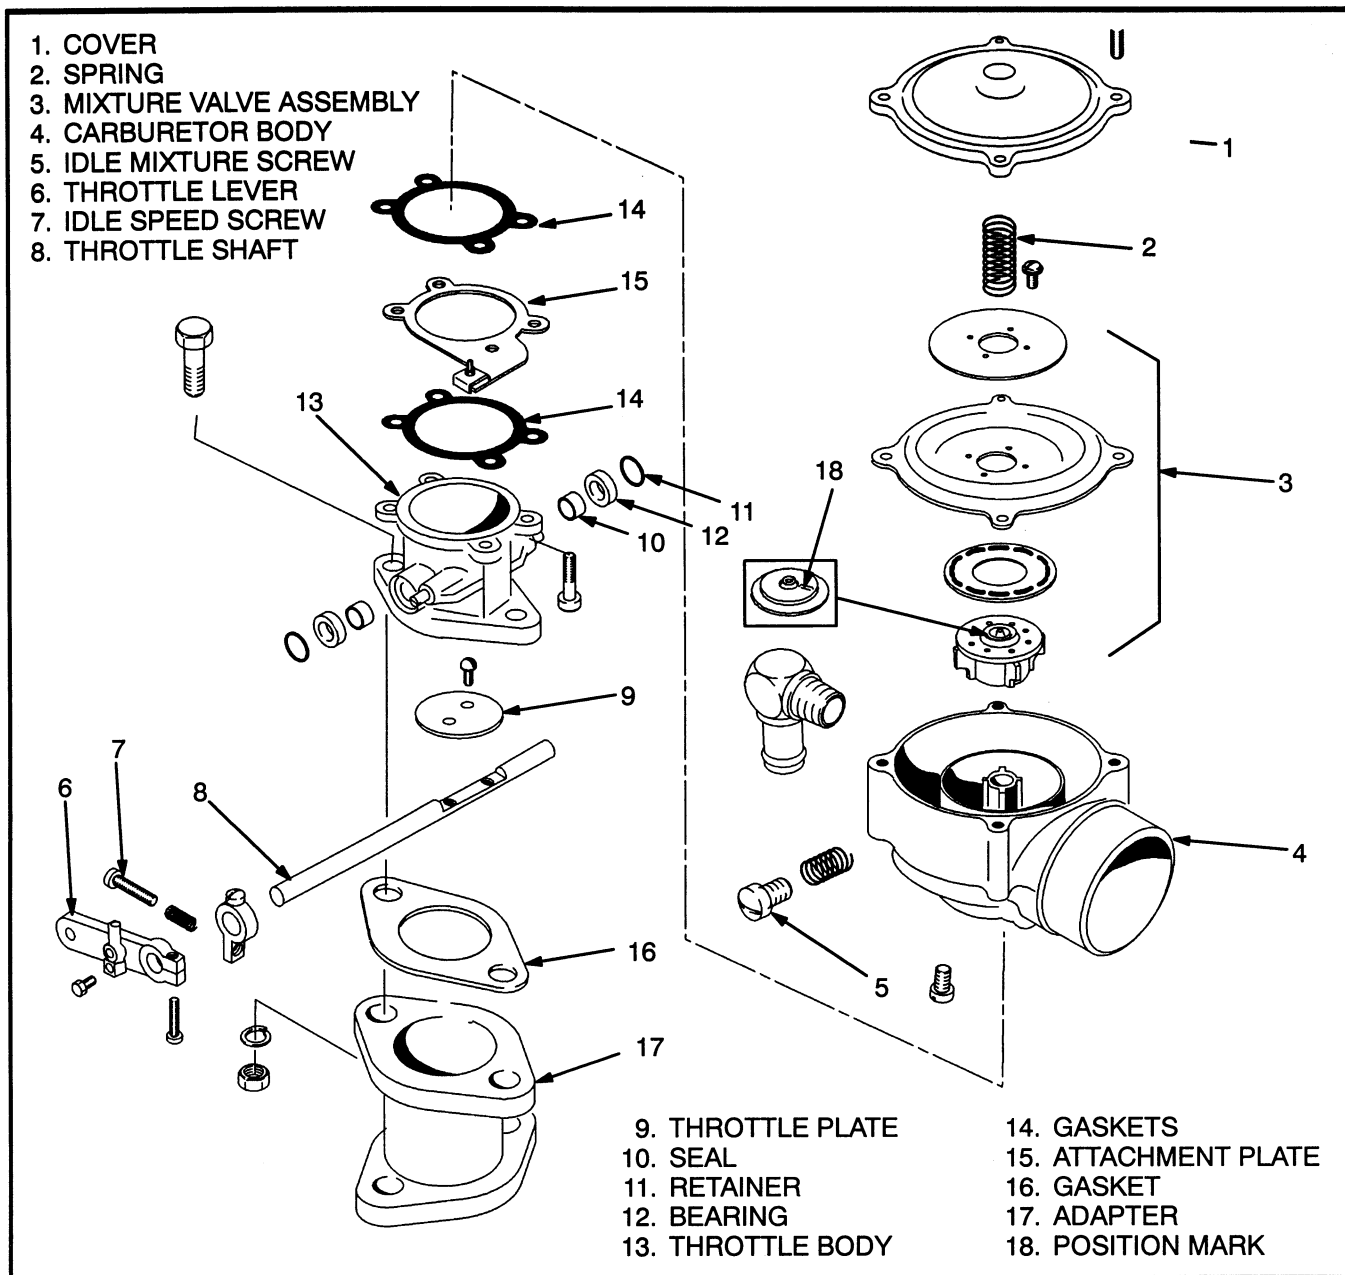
PARTS OF THE CARBURETOR, S/H1.50-1.75XM, S/H2.00XMS (S/H25-35XM, H40XMS)
